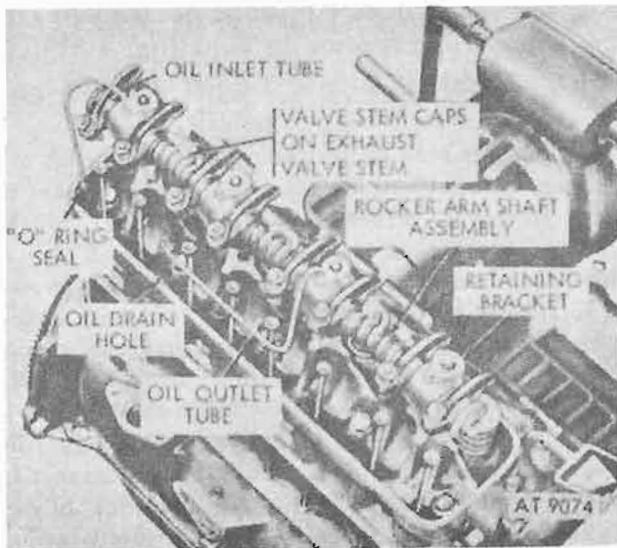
Valve rocker and shaft and shaft with inlet and outlet tube installed.
